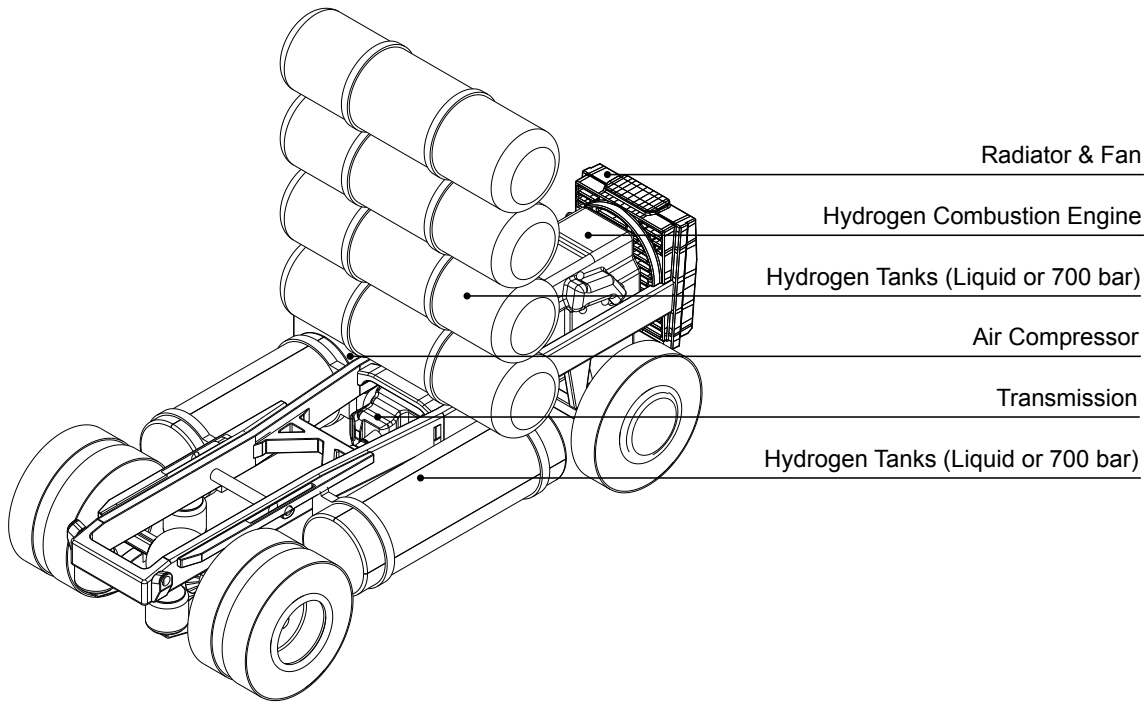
Isometric view of a hydrogen combustion heavy-duty vehicle package. The packaging of the hydrogen combustion engine is similar to a diesel engine. The two hydrogen tanks replace the diesel tanks. The shown packaging has additional tanks behind the cabin to extend capacity and thus range. This maximum utilization of the package space results in a range of approximately 1000 km to 1500 km depending on the hydrogen storage technology. The auxiliary consumers, fan, and radiator are equivalent to a conventional ICET [120].
